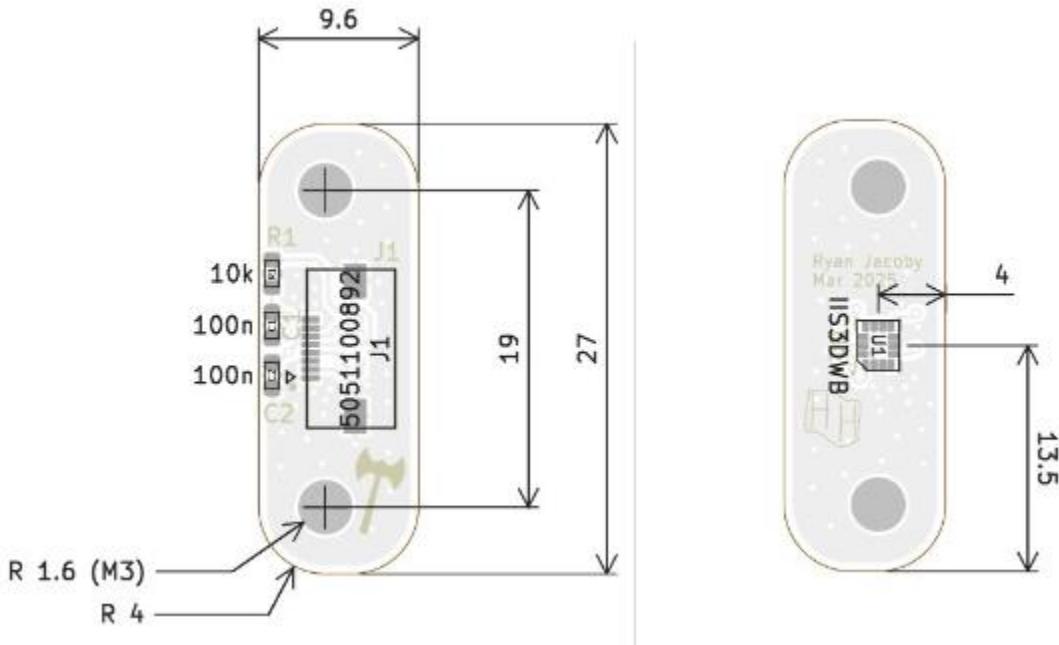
Beta Vibration Sensor Breakout Assembly Drawing
